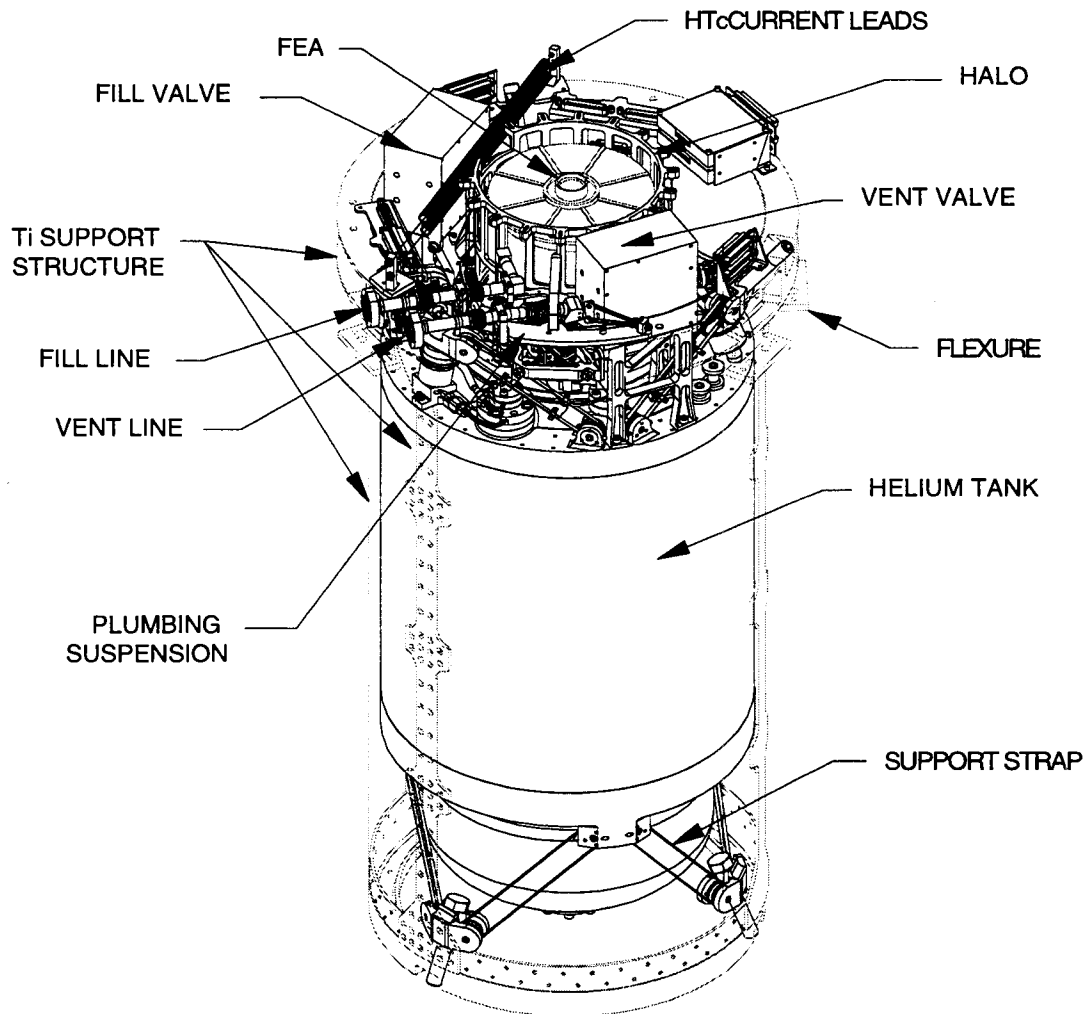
Schematic view of the XRS He Insert showing the principal components.
